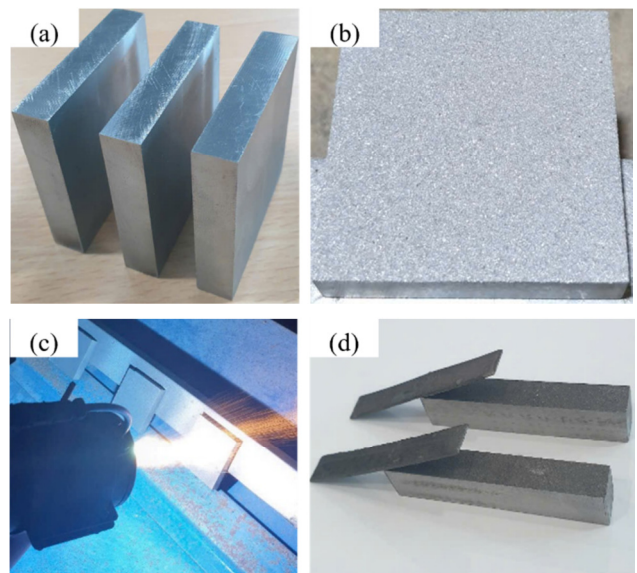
(a) Post-manufacturing sample, (b) surface-roughened sample, (c) APS coating, (d) cut standard test samples.
